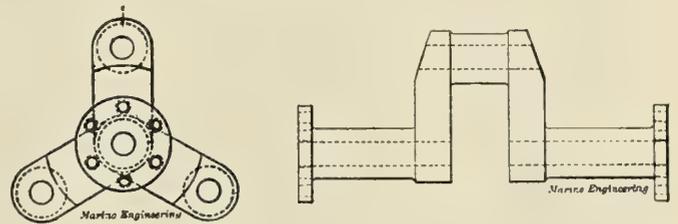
SECTION OF FORGED CRANKSHAFT
